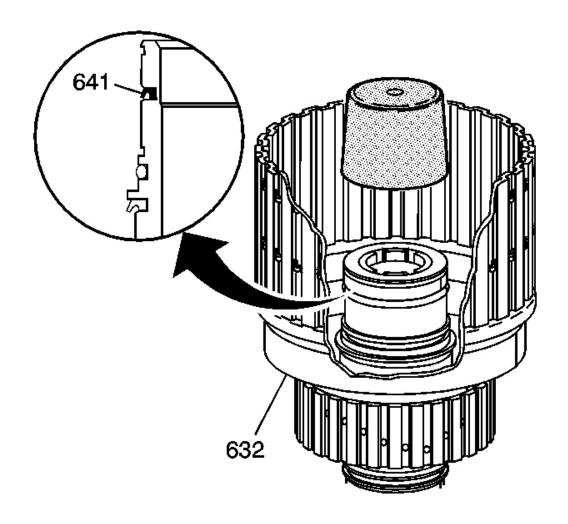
Locating Clutch Piston Inner Seal Courtesy of GENERAL MOTORS CORP.
